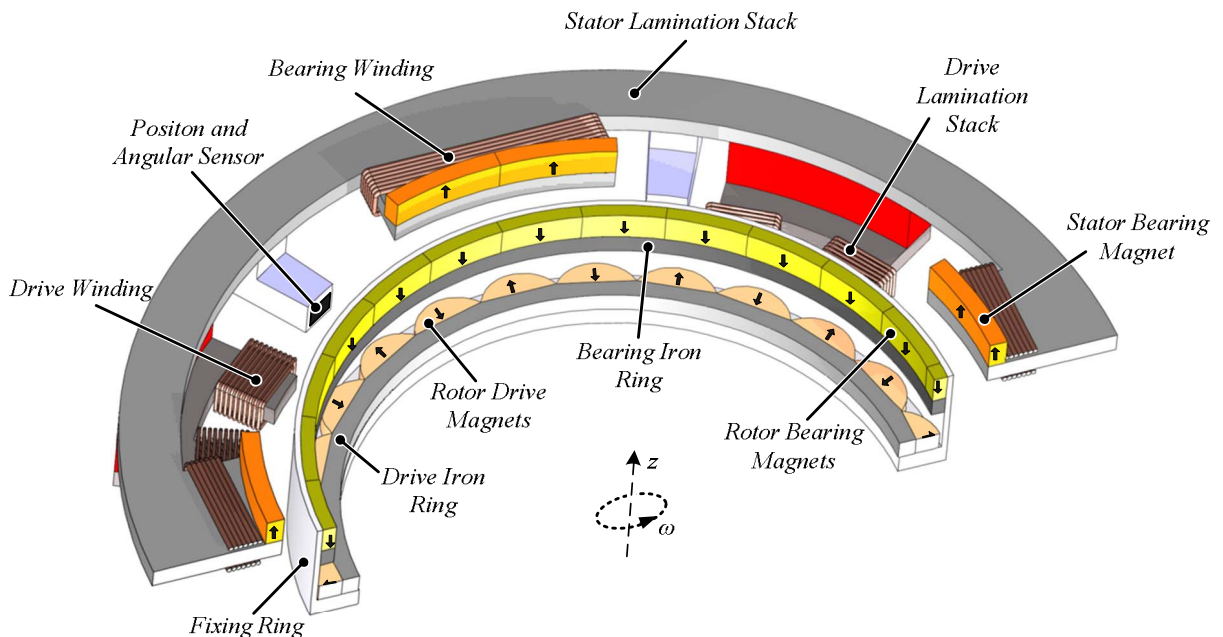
Schematic cut view of the Bearingless 2-Level Motor including bearing and drive units on stator and rotor side.
